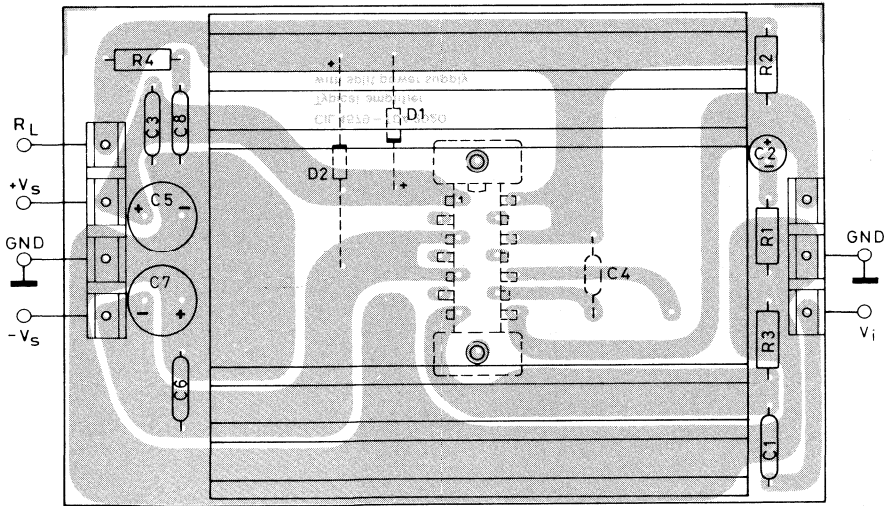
P.C. board and component layout for the circuit of fig. 17 (1:1 scale)
